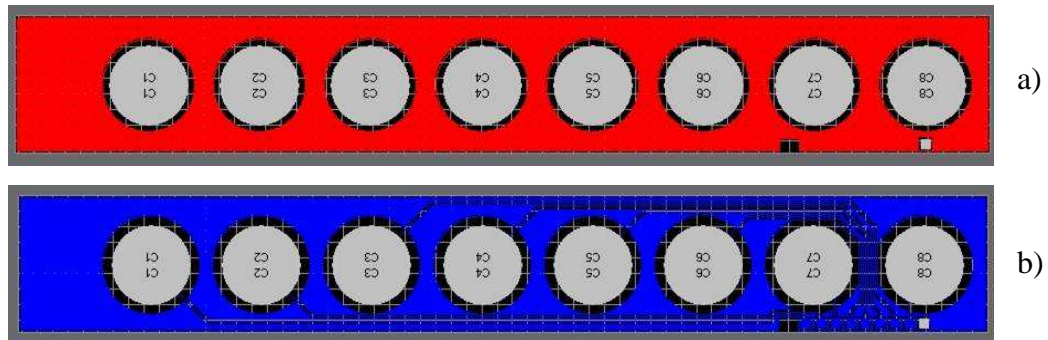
Base gerber files: a) top view , b) bottom view
